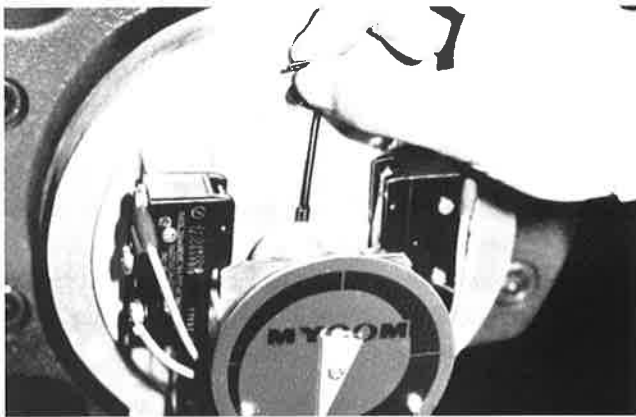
Loosening Allen screws holding cam shaft and micro-switch cam.
